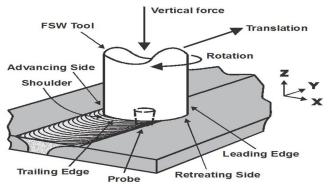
Schematic Diagram of Friction Stir Welding (FSW)
